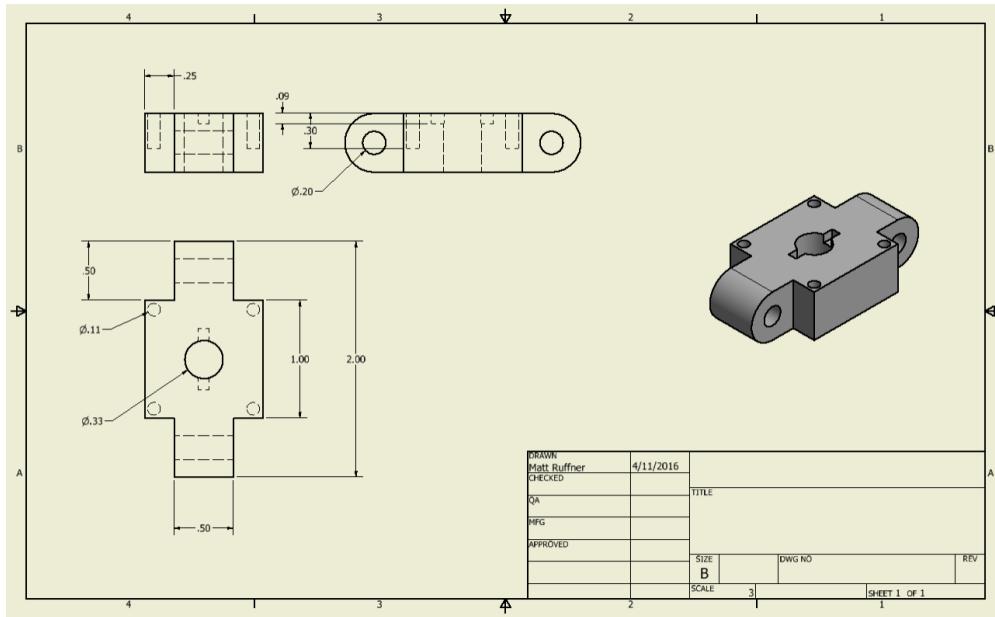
Bottom Shaft Anchor. Drawing showing bottom mounting point that affixes steel rods to driven shaft. Dimensions in inches.
